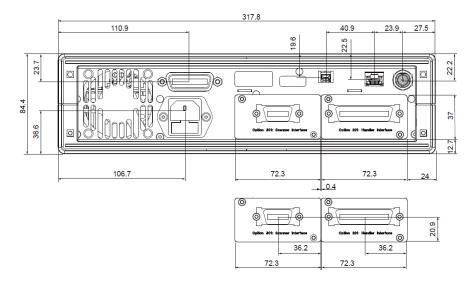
Dimensions (rear view, with handle and bumper, in millimeters, nominal)
